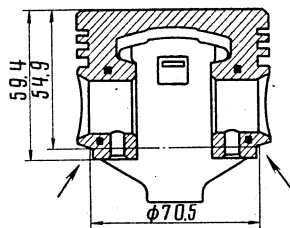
Points (Shown by Arrows) Where Metal Can Be Removed to Equalize Piston Weights
